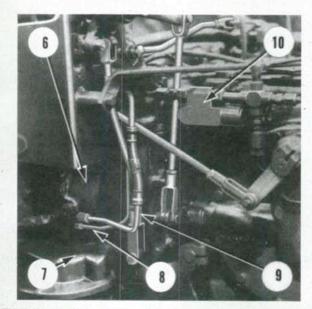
Disconnect points for removal of hydraulic pump and adapter plate. Model TW-35 is shown: other models are similar except that the separate hydraulic line (8) for differential lock is not used.
